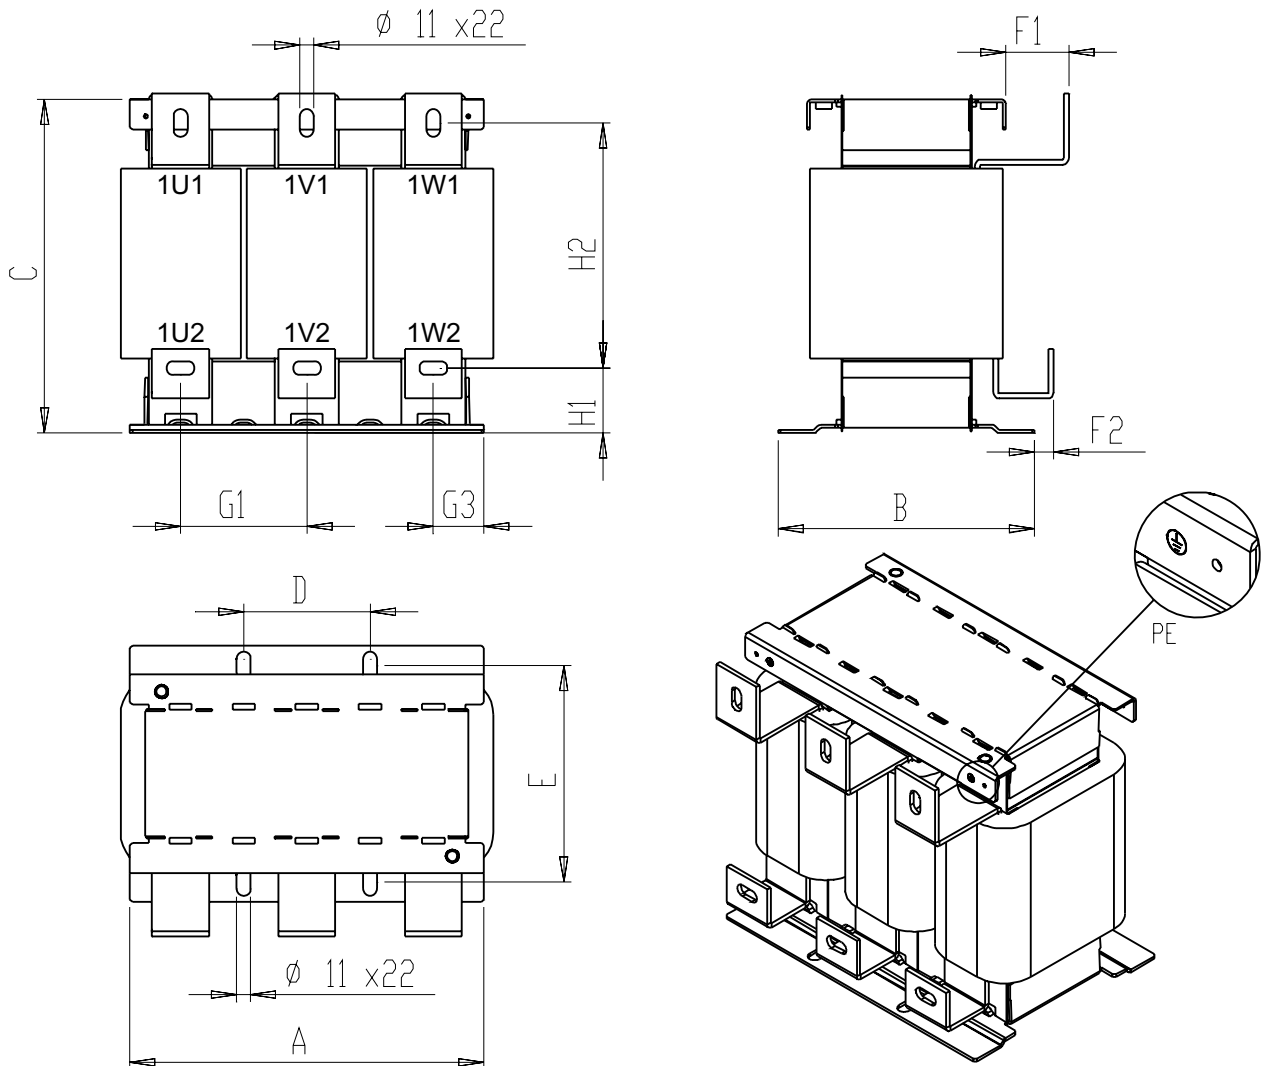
Dimension drawing of line reactor 6SL3000-0EE36-2AA0
